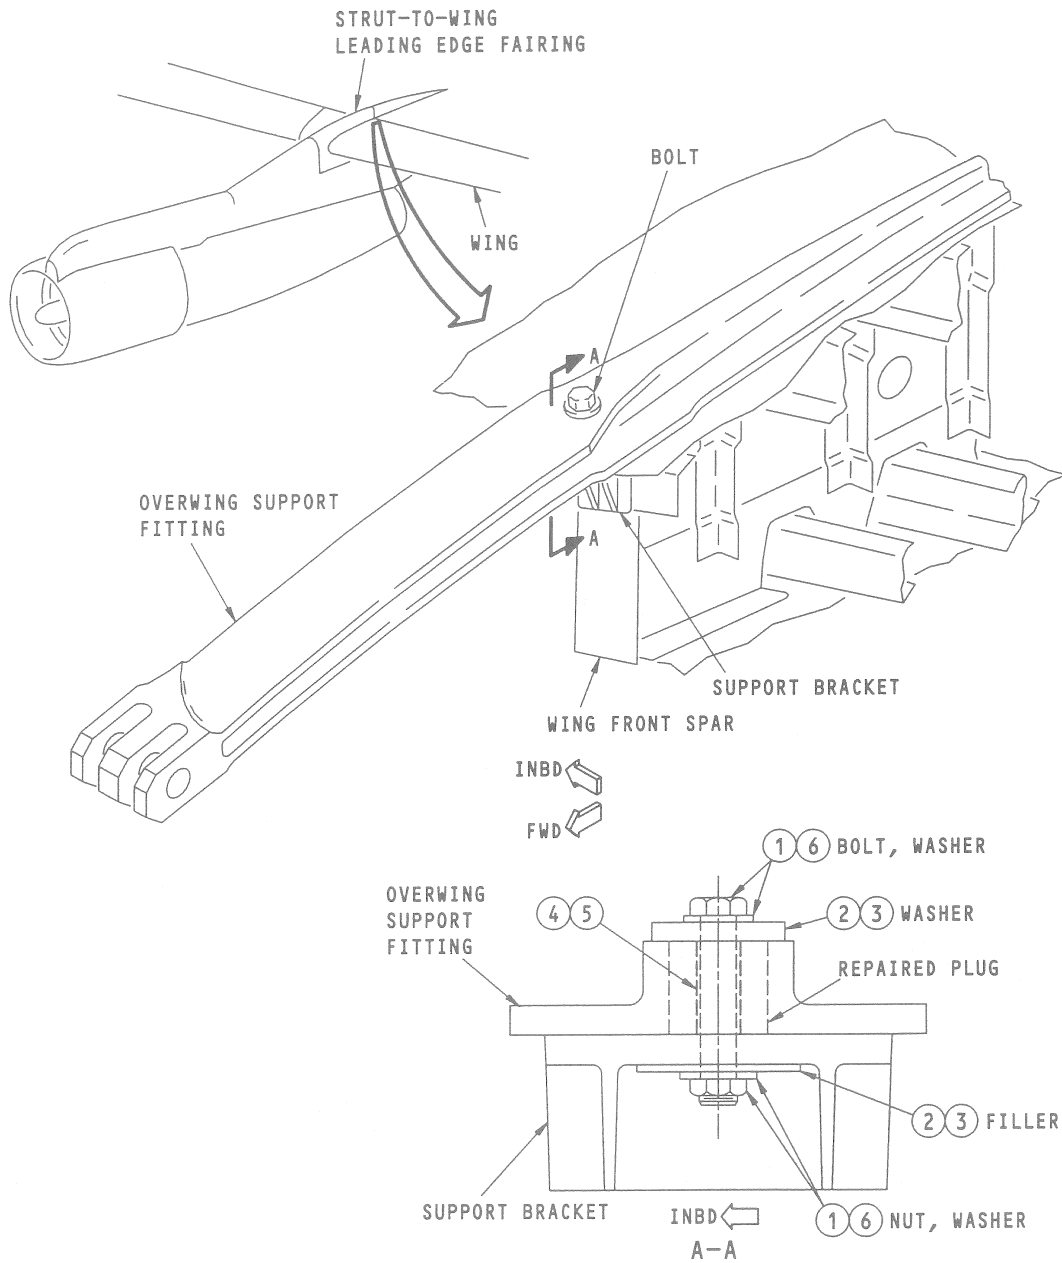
OVERWING SUPPORT FITTING BOLT REPLACEMENT
